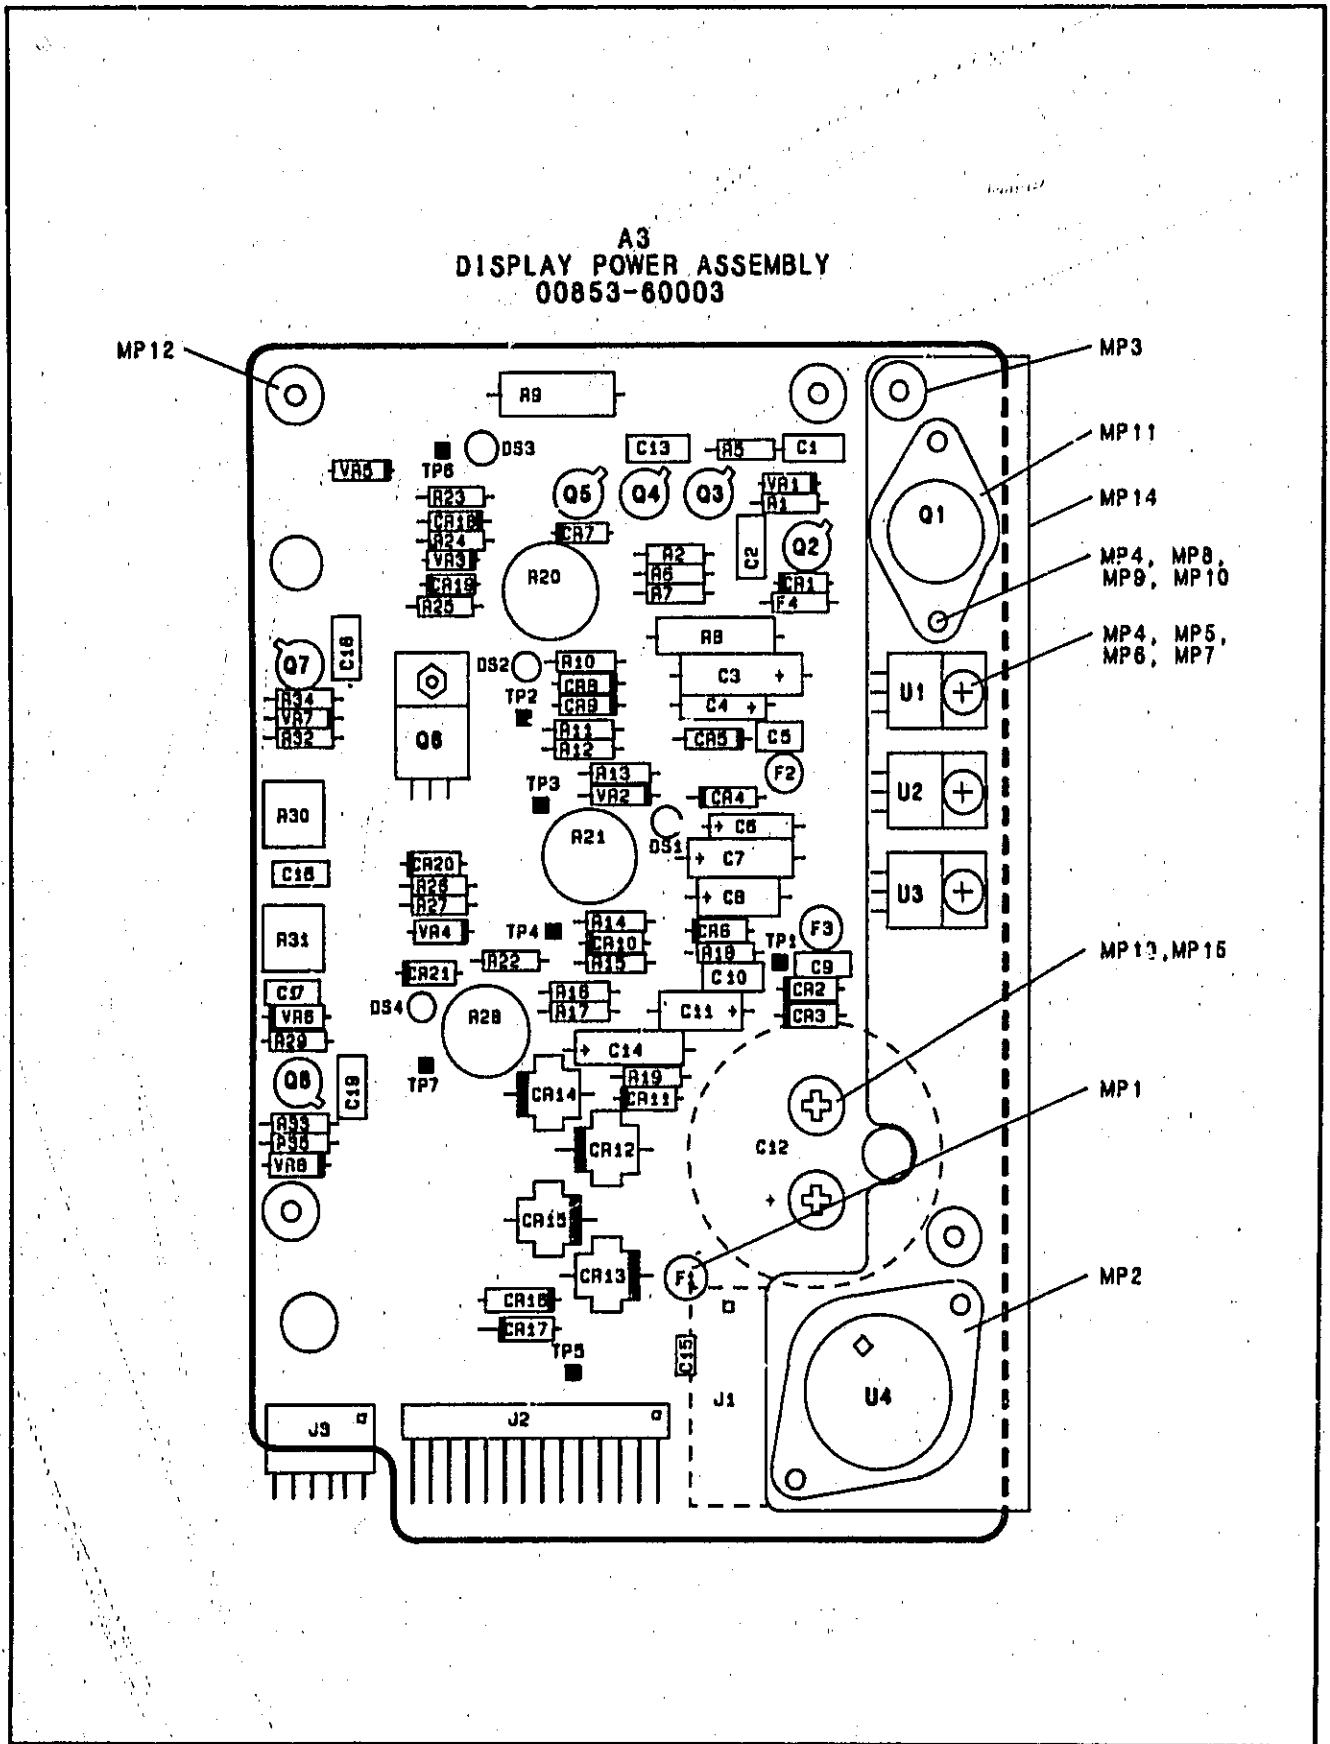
Display Power Supply Assembly A3, Component Locations
